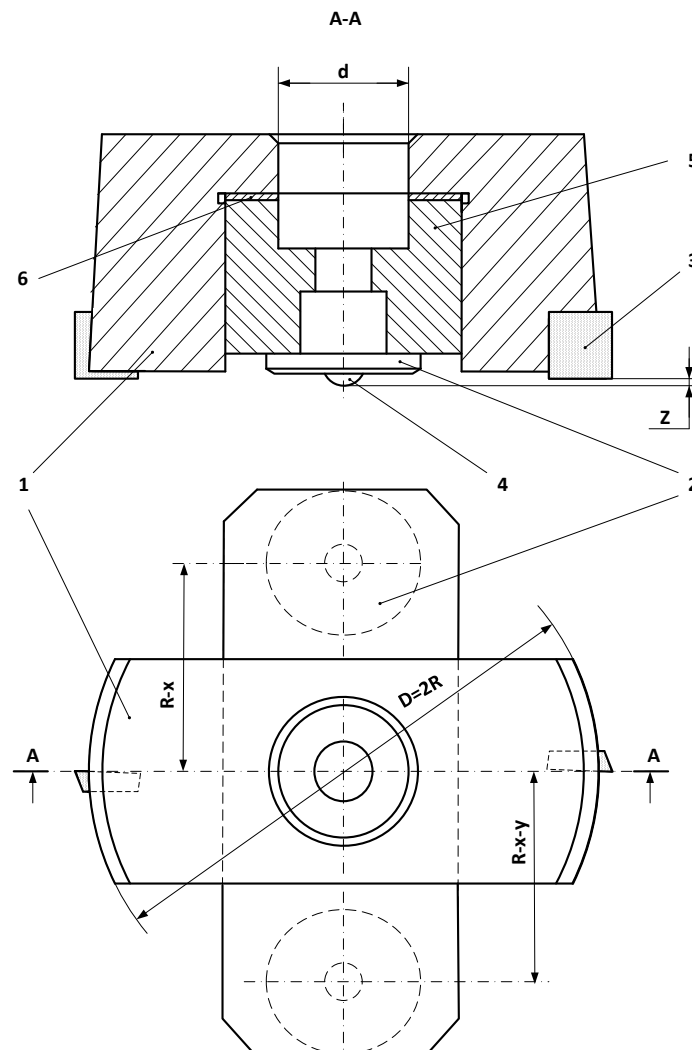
Modular milling and press hardening tool: milling cutter (1), pressing subassembly (2), inserts (3), ball (4), support-piece (5) and spacer (6).
